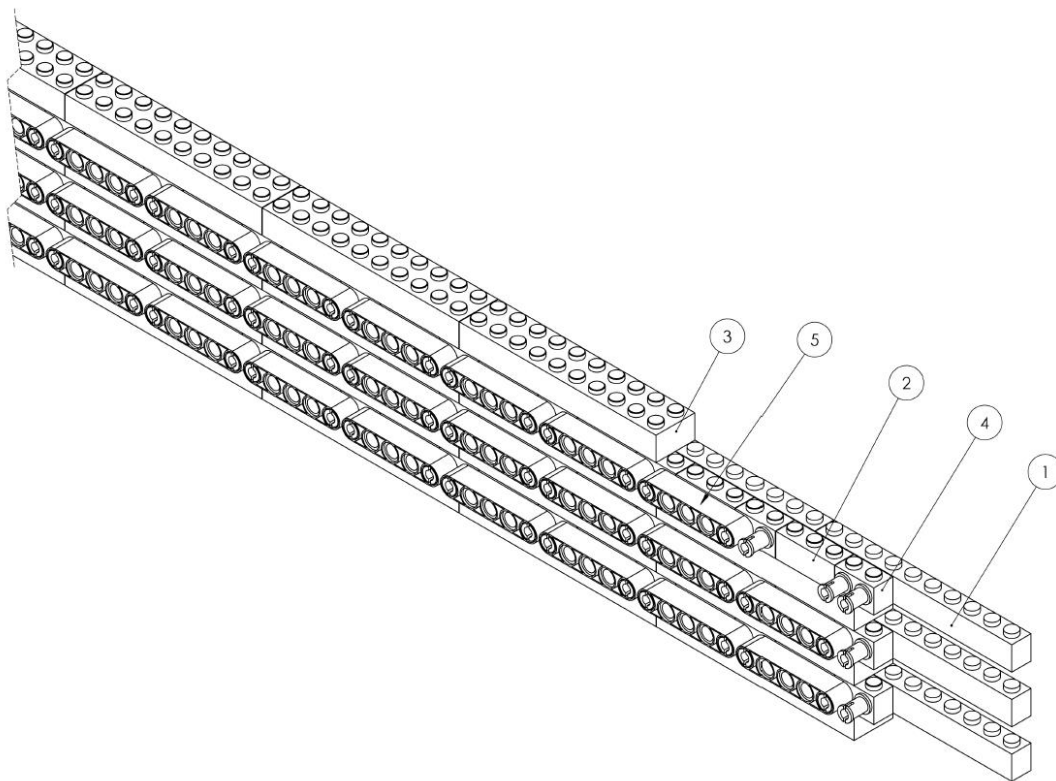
Rendering of part of one of the Wall sections of the beam (SOLIDWORKS®)
